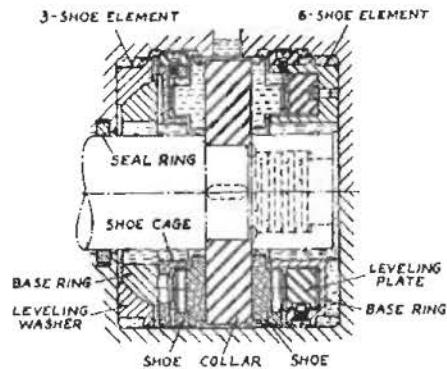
Three-shoe and six-shoe double horizontal thrust bearing, with main features of mounting.
